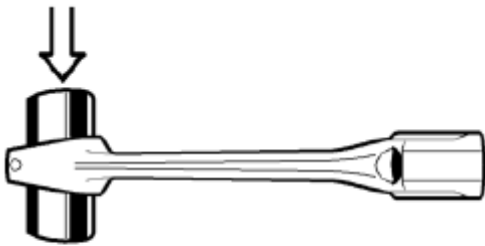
Removing Piston Pin Circlip With Special Tool (11 4 492)
